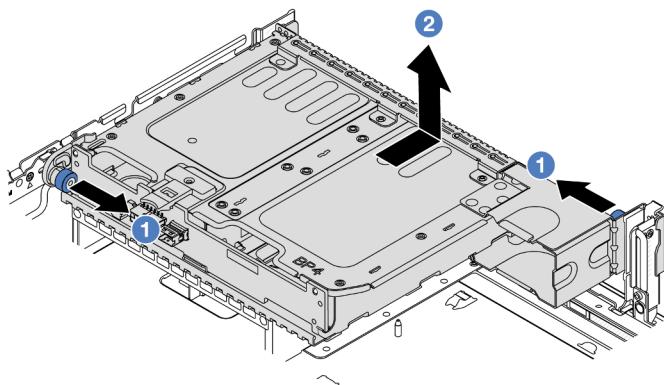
Removing the 2 x 3.5-inch rear drive cage
